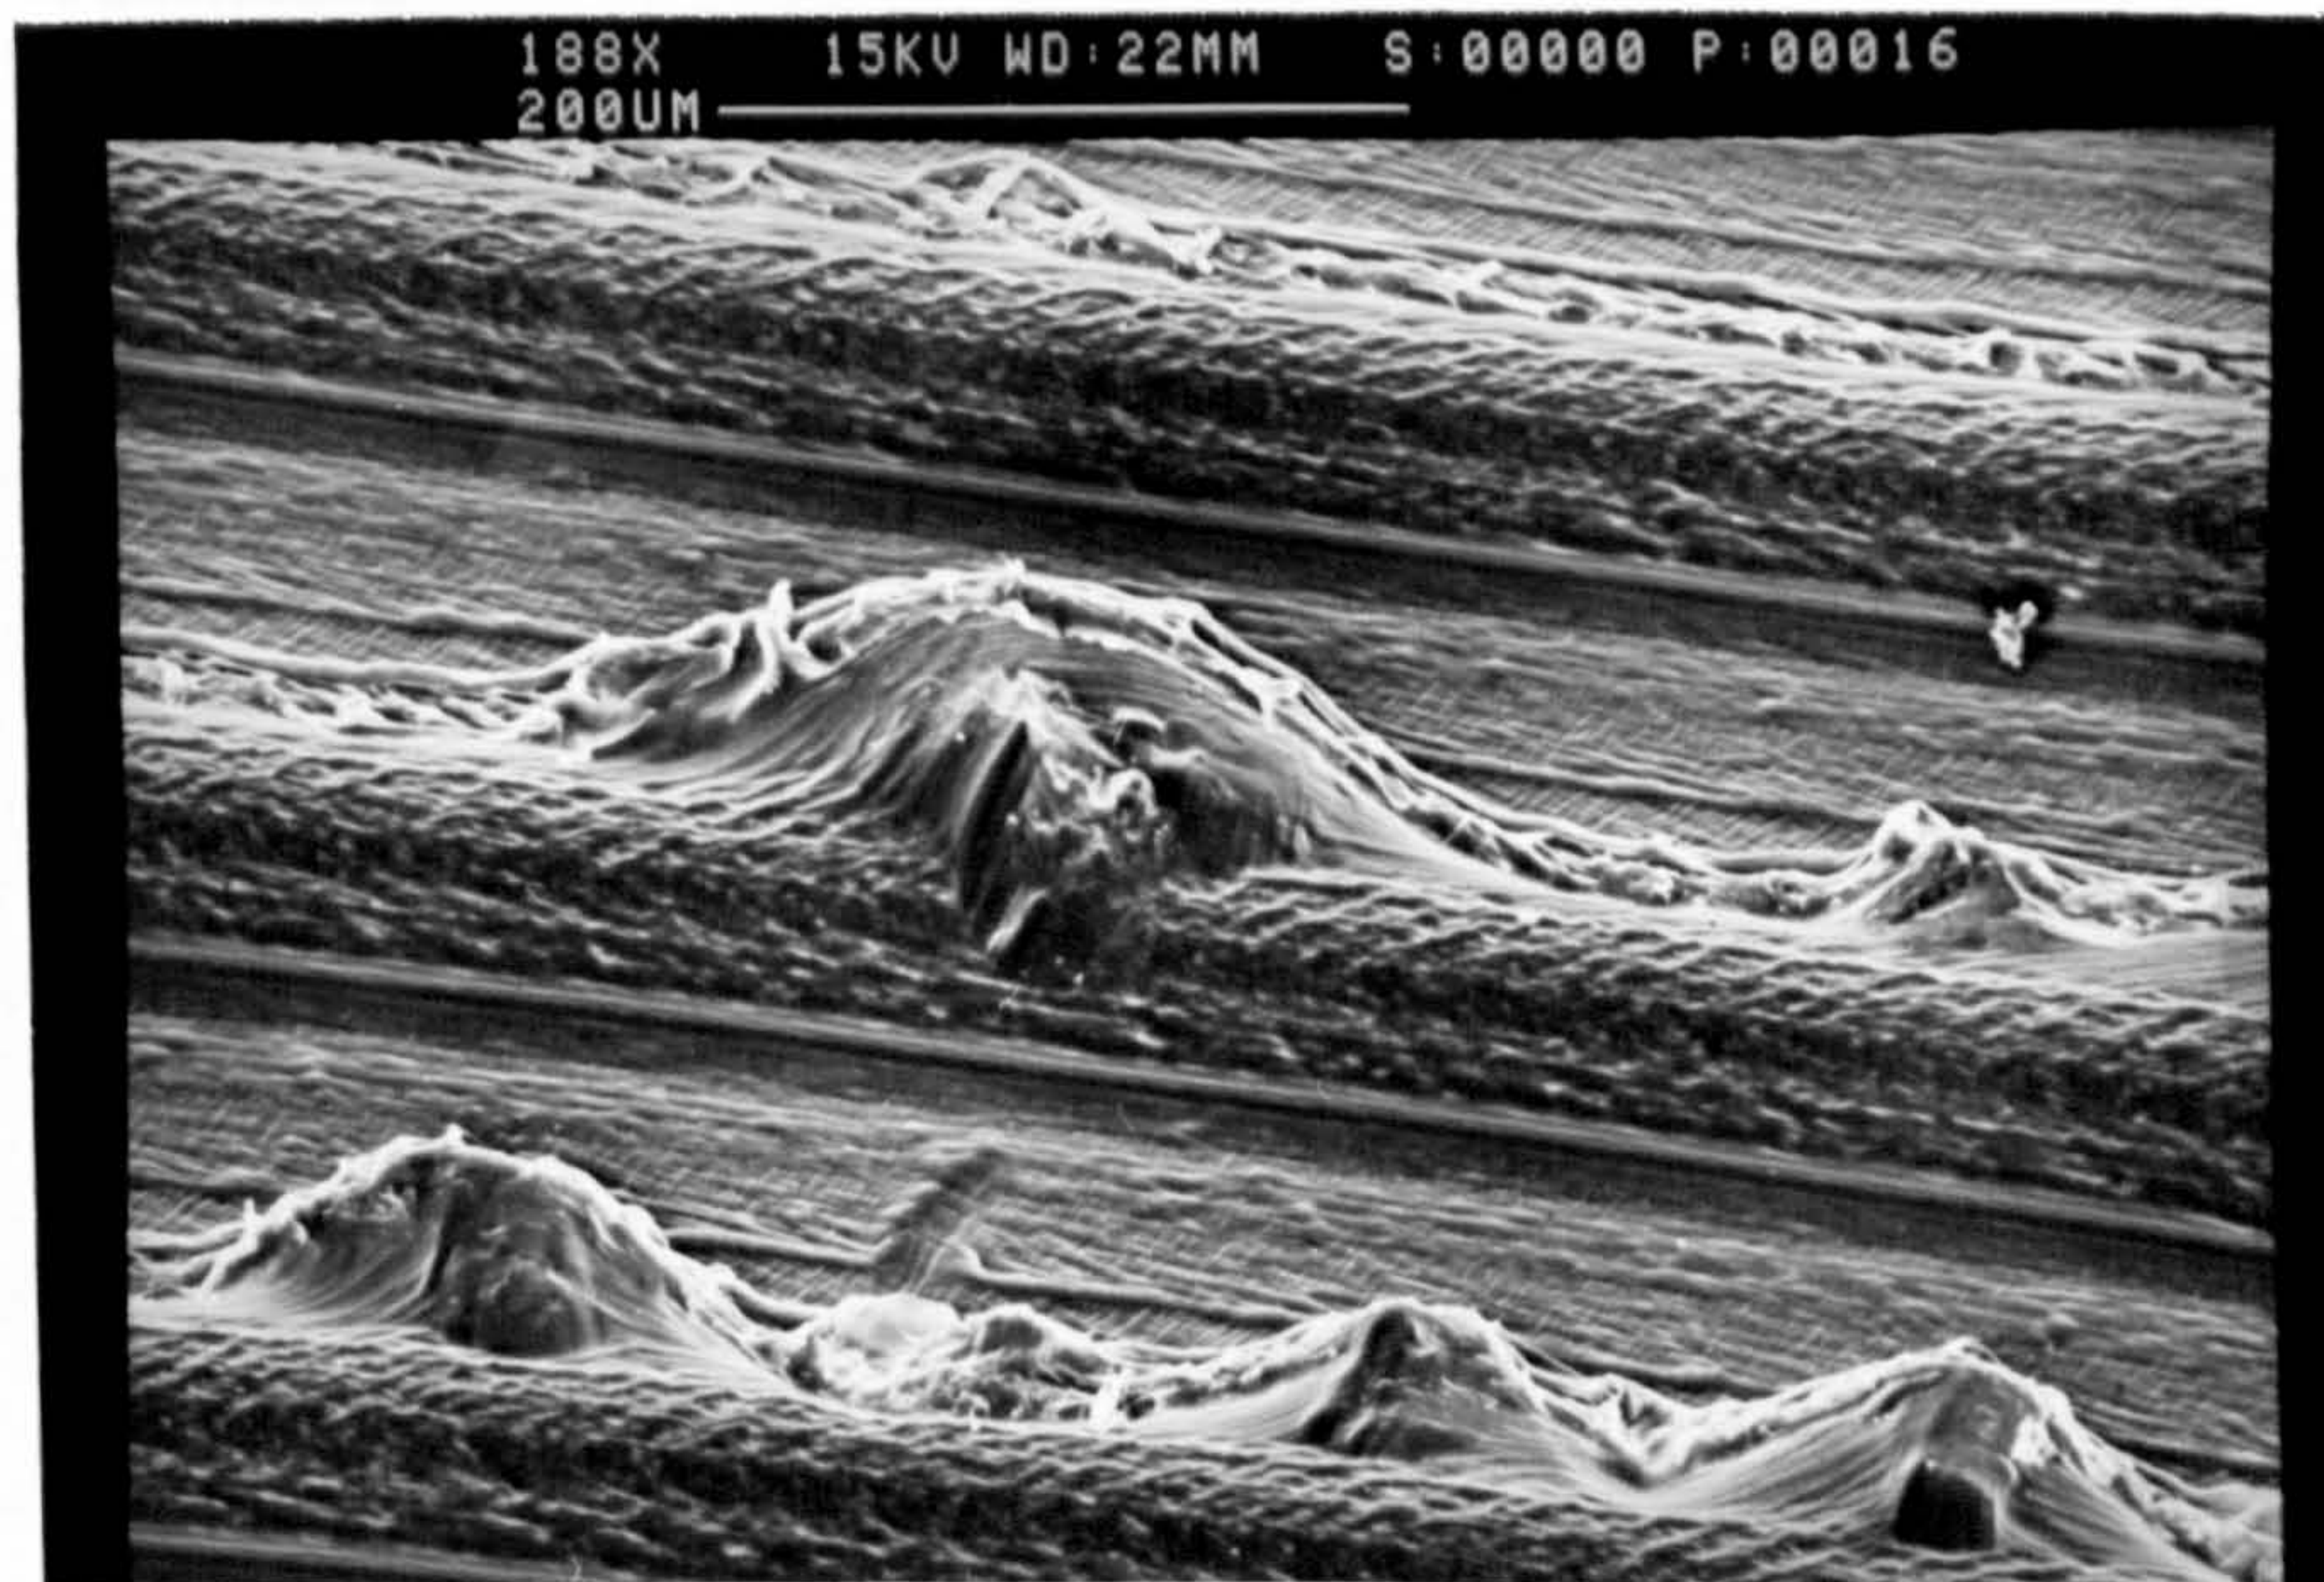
Machined HDPE surface showing the bulging of work material near feed marks. (Rake angle =  $-20^{\circ}$ , speed = 250 m/min, feed = 0.16 mm/rev)
